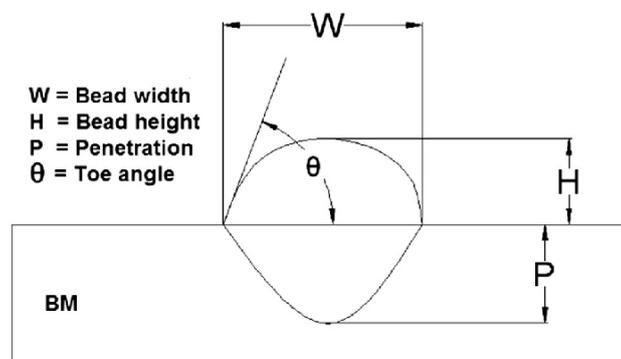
Schematic diagram of weld bead geometry (from Kumar et al, 2015)
